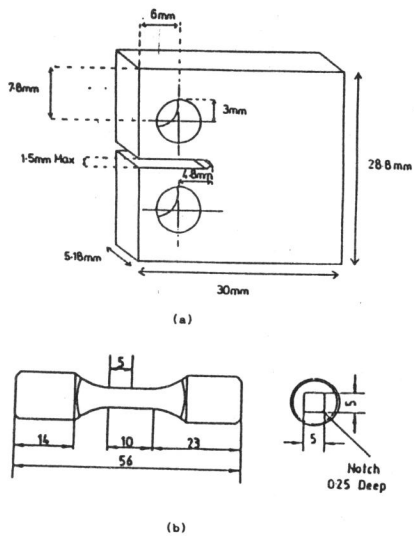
(a) CT specimen, (b) CCT specimen. Dimensions in mm.
